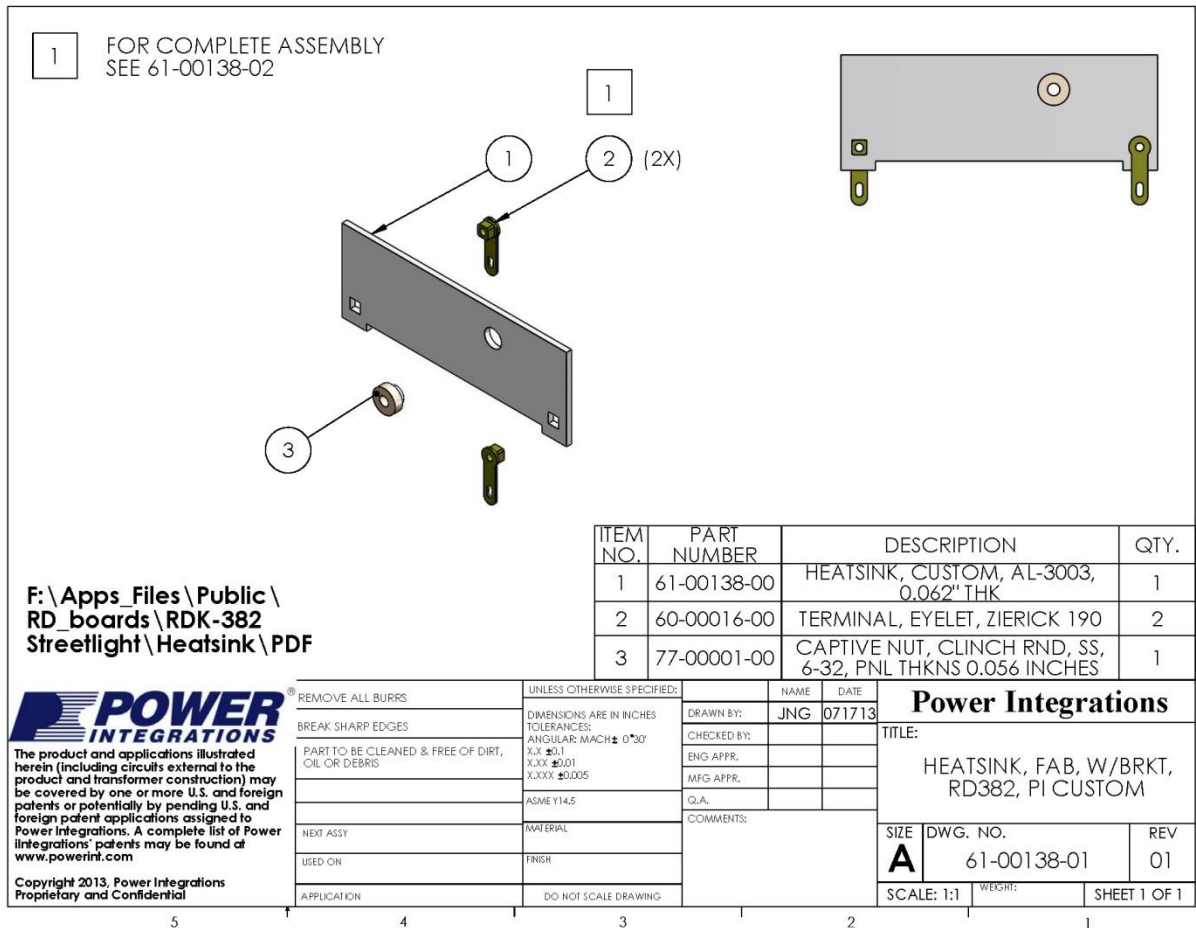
Secondary Heat Sink Sheet Metal Drawing.
